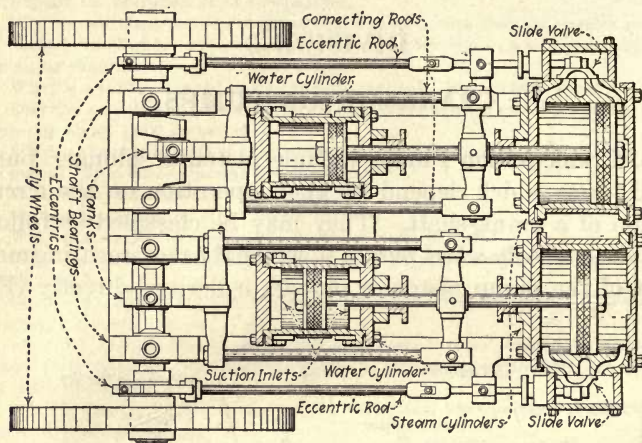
Horizontal Section Of A Double-Acting Duplex Crank-And-Fly-Wheel Pump.
